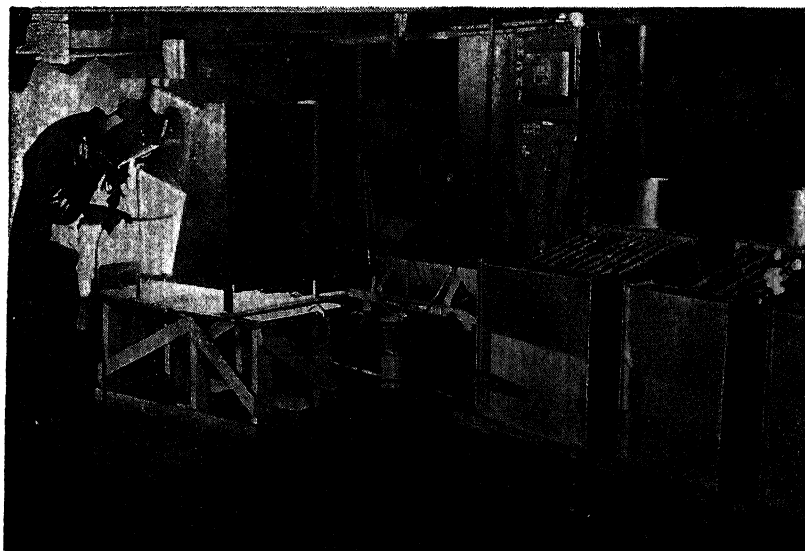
Welding the flue section of domestic furnaces. This is mostly 12 gauge sheet.
